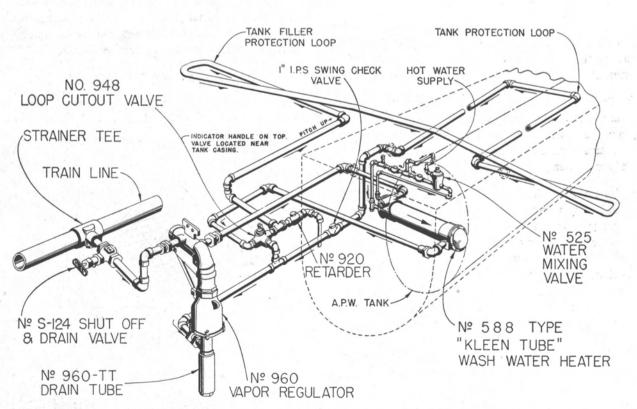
Schematic Diagram Showing Use of No. 948 Cut-Out Valve in Summer and Winter
